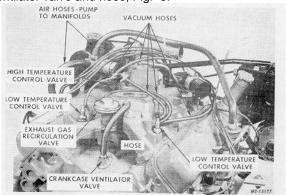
Removing Air and Vacuum Hoses As Well As Crankcase Ventilator Valve and Hose
